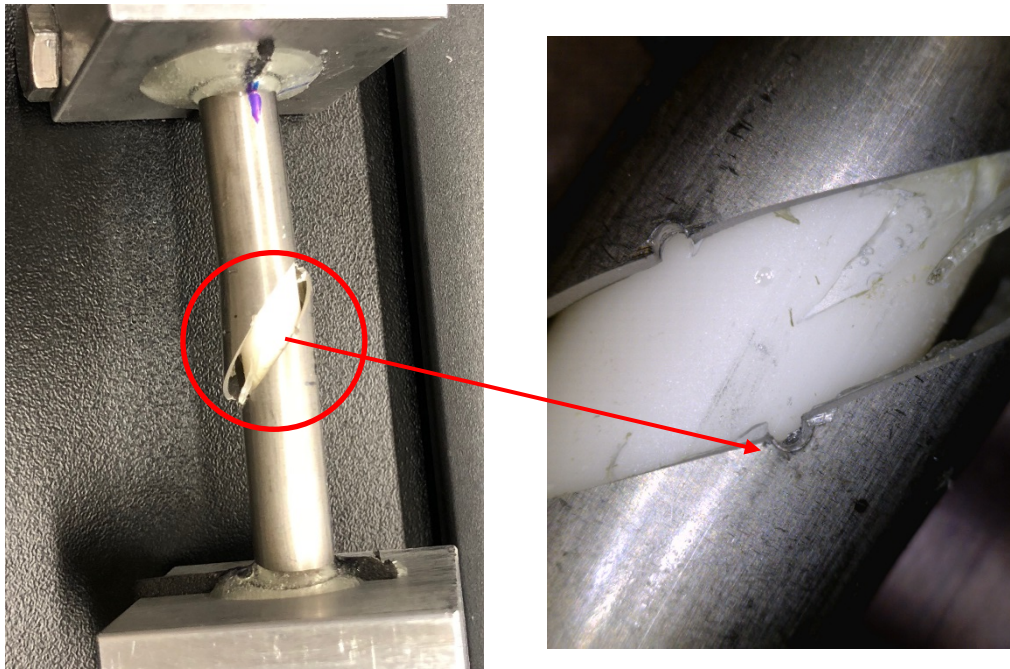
SS304 clad SNTT sample with 3-mil circular hole as crack starter.
